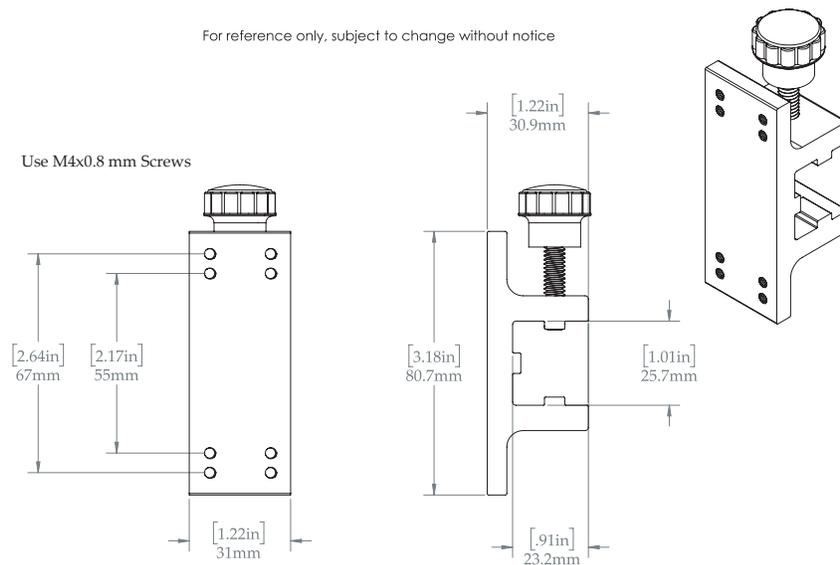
1" Sensor Mounting Bracket for use with 1" extrusion or 25 mm extrusion
